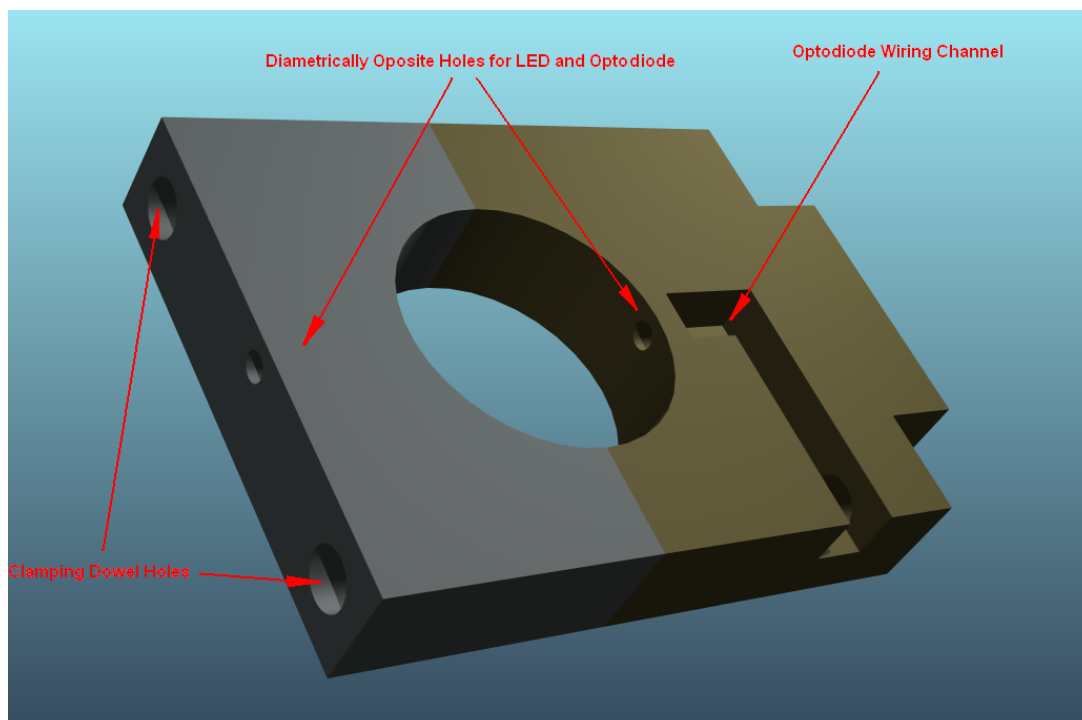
Stator coil form mounting block showing diametrically opposite holes for armature coil optical sensors.
